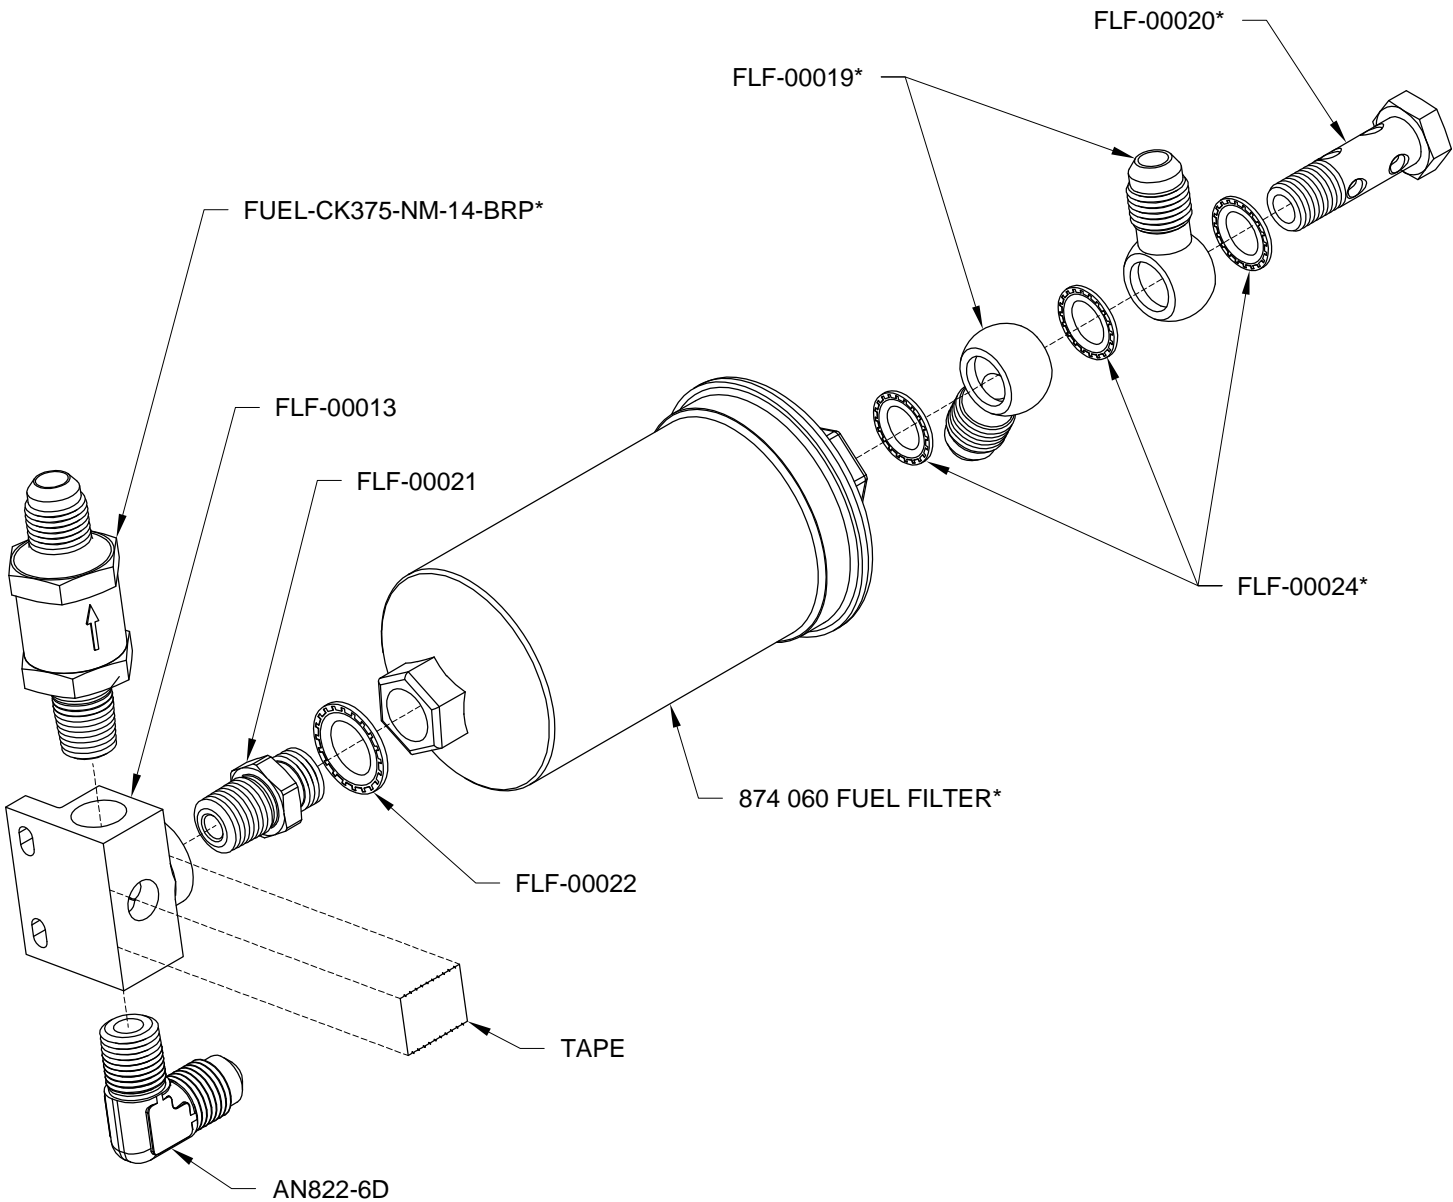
MAIN FUEL FILTER ASSEMBLY
